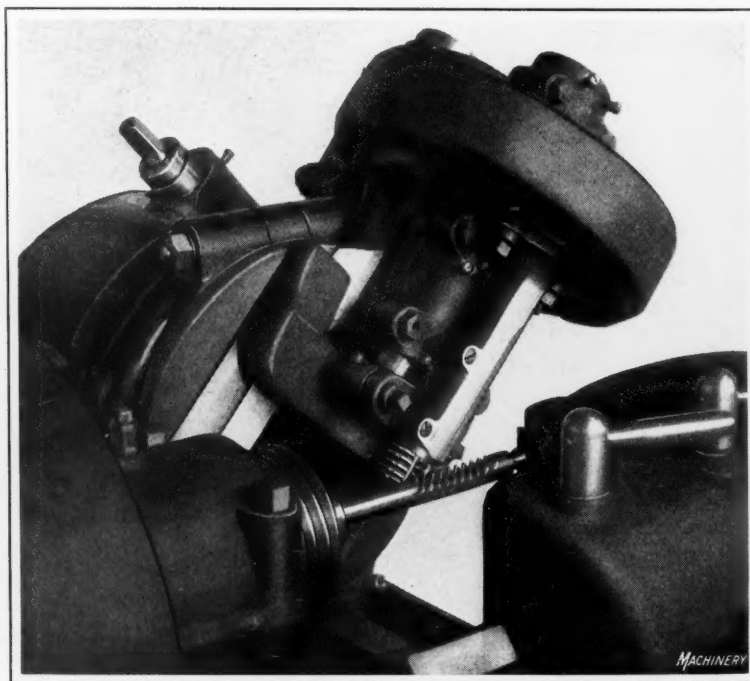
Cutting a Small Helical Pinion of 45-degree Angle
